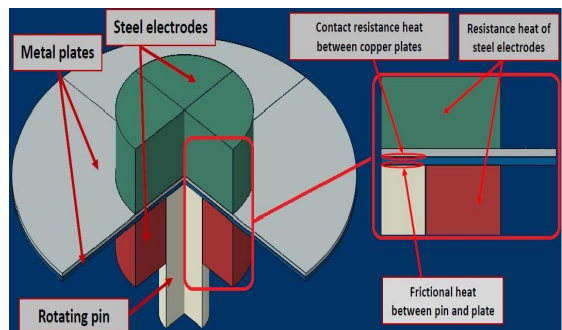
Three types of heating method in weld zone of electric Resistance heated Surface Friction Spot Welding (RSFSW) process
